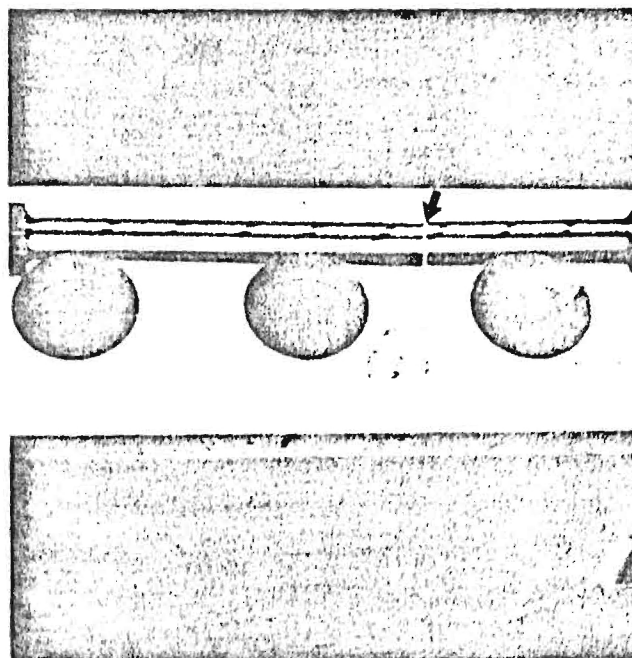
C — Torsional test fixture showing 1/4 in. (7 mm) 1020 steel shaft after fracture (arrow). Black spiral reference mark was a premarked straight line along the shaft prior to rotating from the right side 8 3/4 turns to cause torsional shear fracture.
